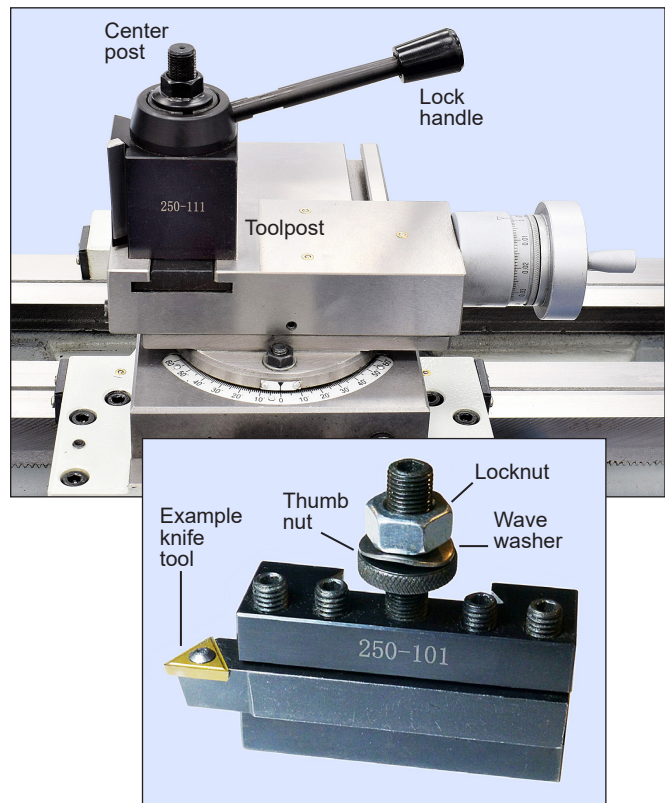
QCTP with toolholder This style of toolholder is used for rectangular-shank tools up to 1/2" x 1/2". Its height is set by the thumb nut resting on the top surface of the toolpost. The wave washer and hex locknut prevent accidental rotation of the thumb nut. To rotate the QCTP, loosen the center post.
